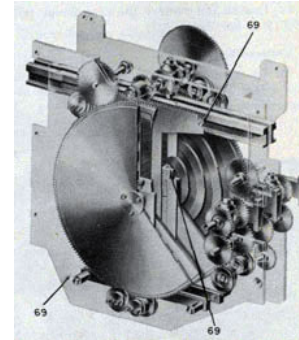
Removal of Supporting Plate from Front Angle Solver.
